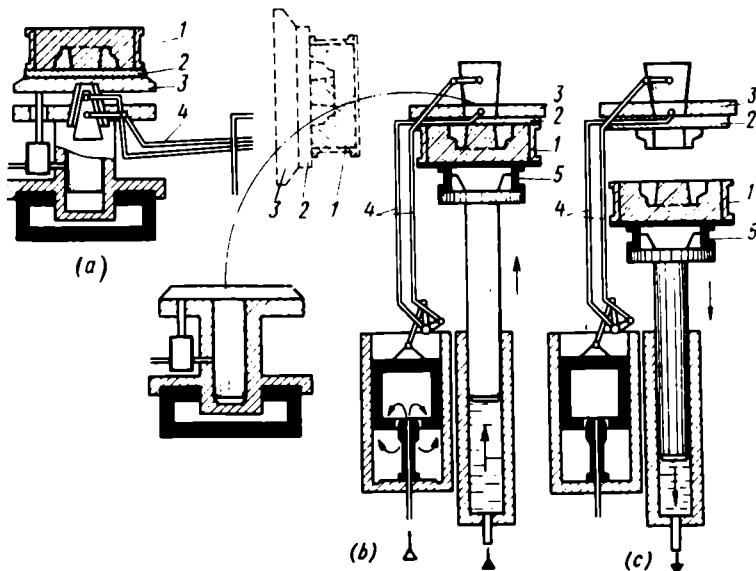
Stages of manufacture of molds on a jolt rollover-draw machine
